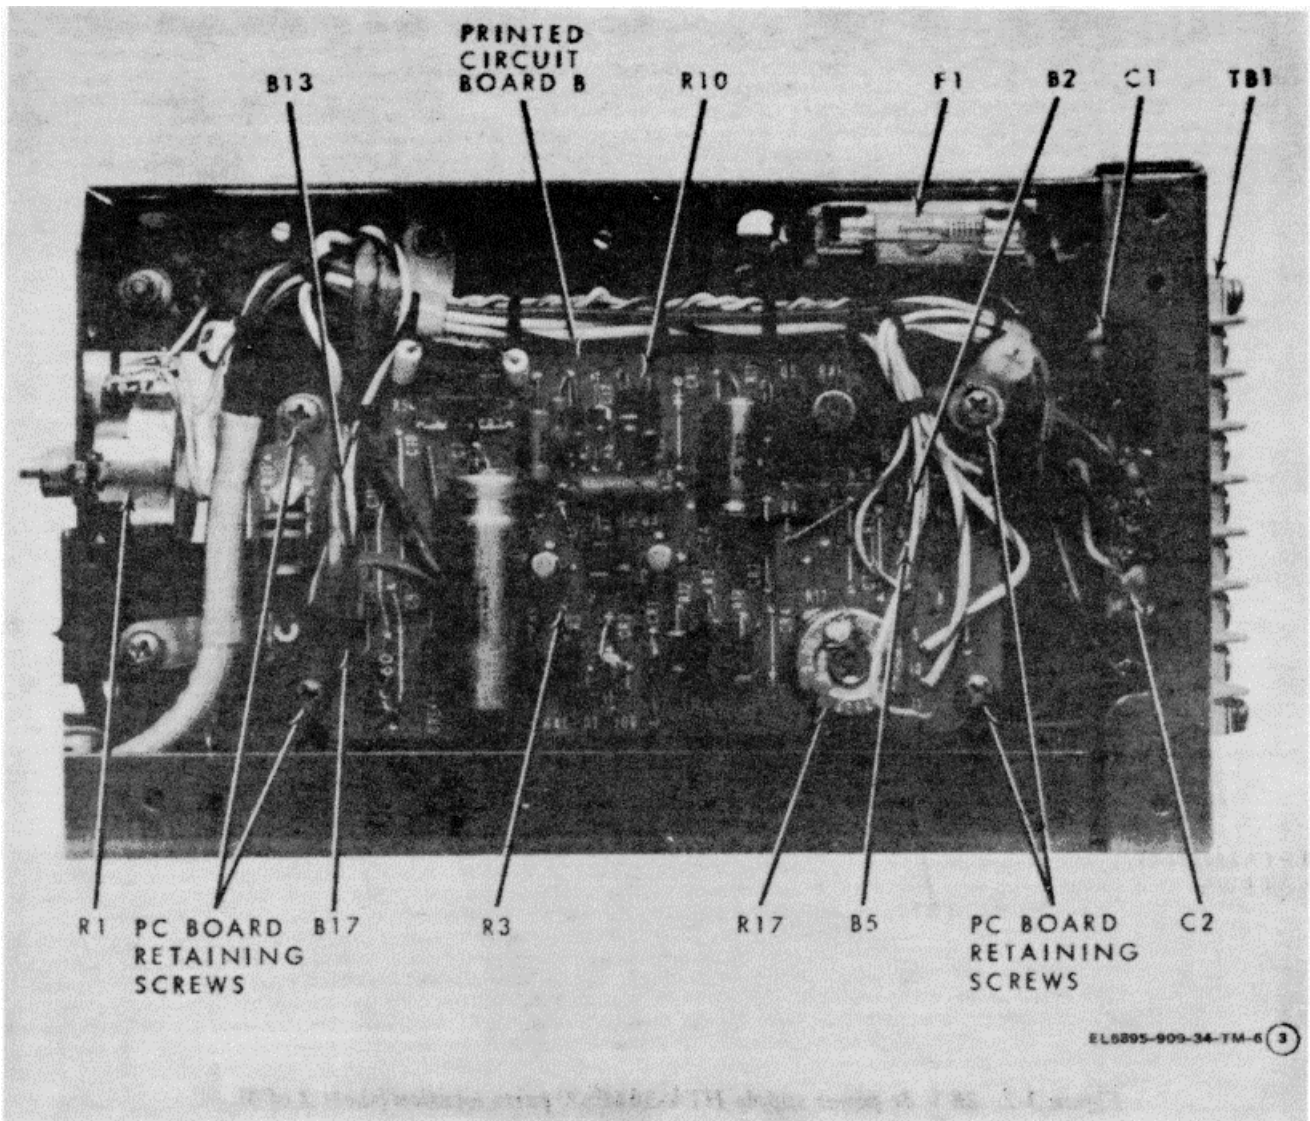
28 V dc power supply HTA-3A6PS1, parts location (sheet 3 of 5)
